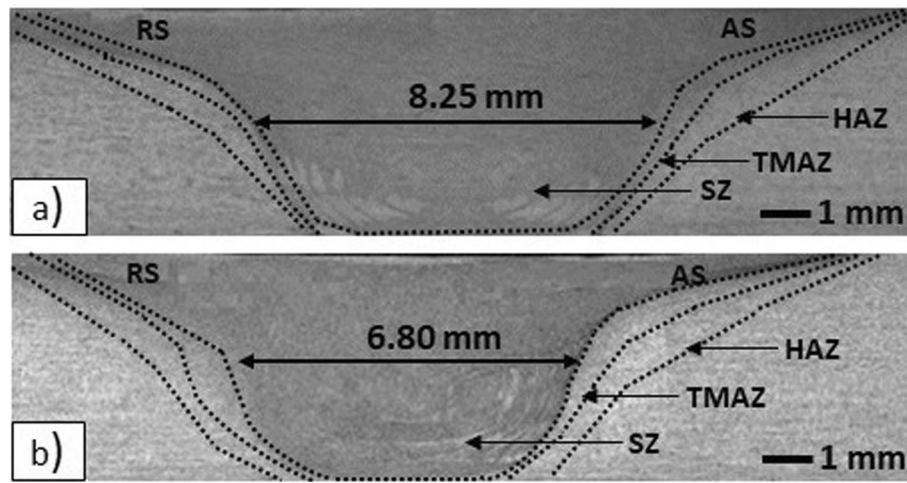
Macrostructure of the welds produced with the tapered cylindrical pin (a) and the hexagonal pin with grooves (b)
